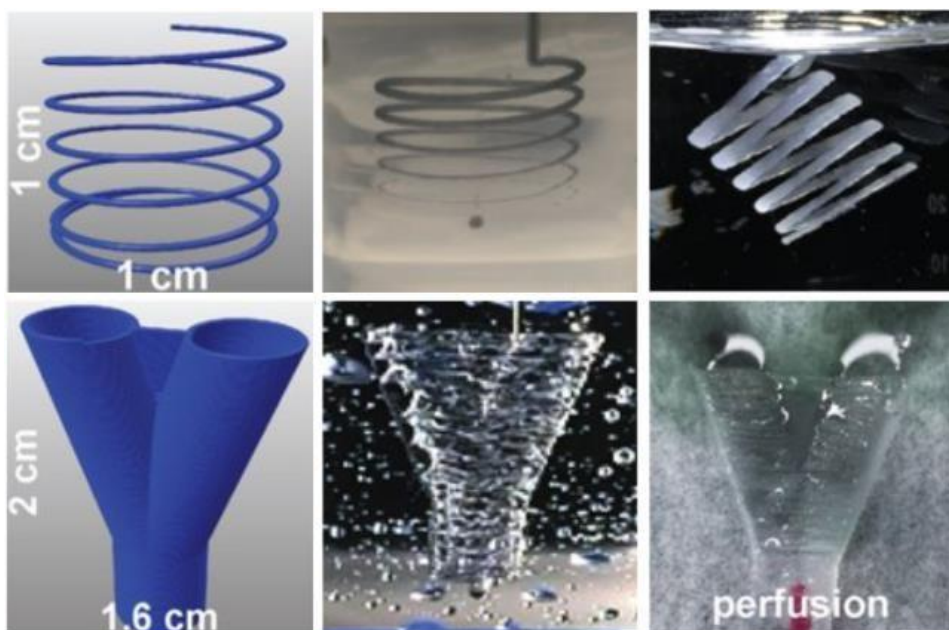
PDMS structures printed using the FRE technique on Carbopol support. (A) G-code for helical structure. (B) Carbopol gel can support freeform extrusion. (C) Extruded form in the Carbopol identical to the G code. (D) G-code of tubular structure. (E) The FRE printed PDMS bifurcation embedded in Carbopol. (F) Perfusion of dye through the bifurcation, splitting fluid flow ¹⁸.
